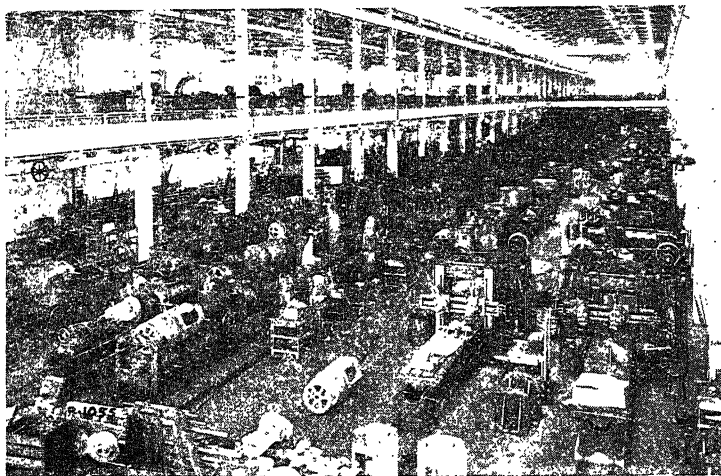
A view of a typical large machine shop. (Courtesy of The Bullard Company.)
